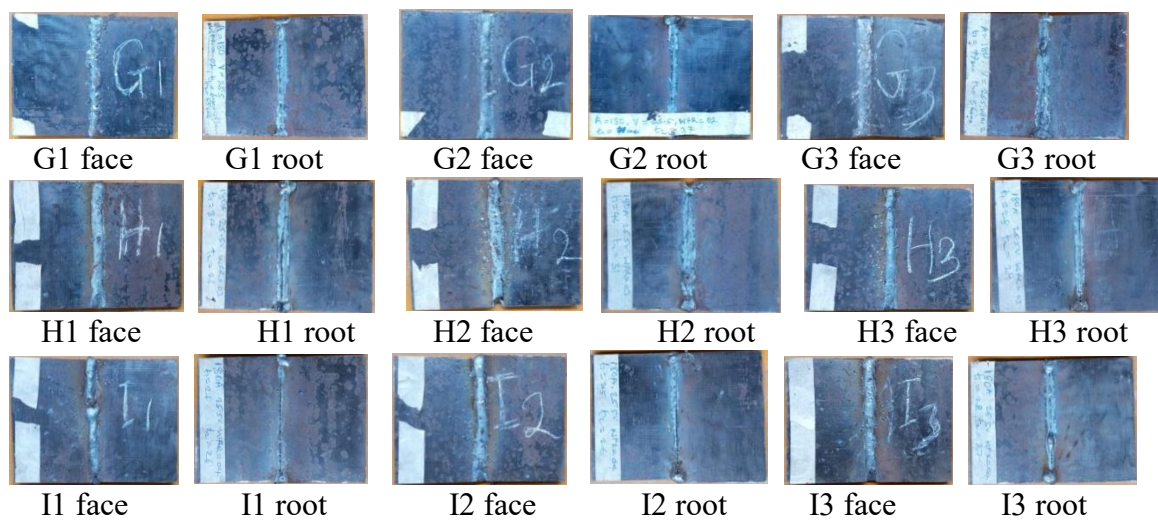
Samples G, H, and I welded in triplicates, showing their face and root passes.
